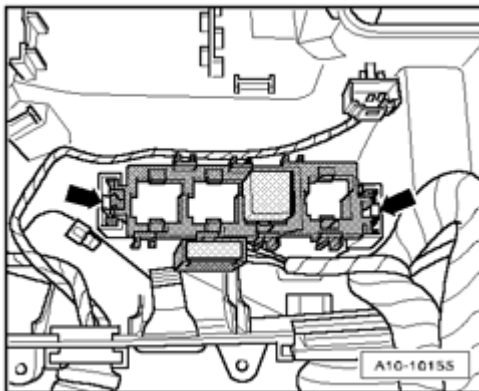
Releasing locking mechanisms and remove relay carrier upward
